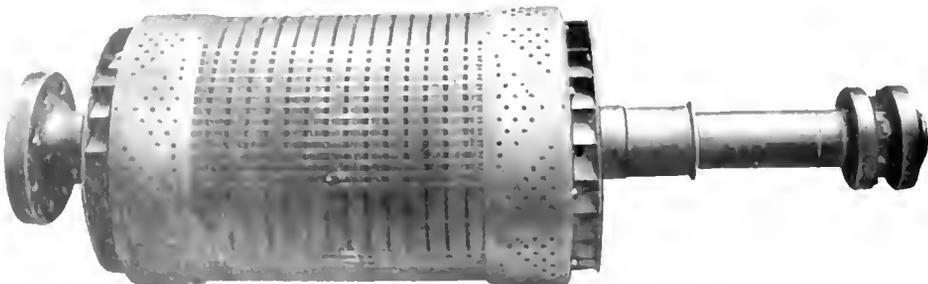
Complete Rotor of Four Pole Turbine-Driven Alternator, Built up of Laminations
